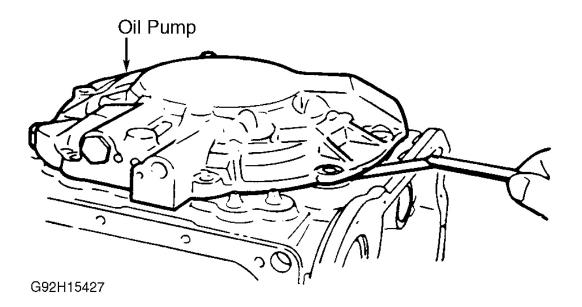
Measuring Oil Pump-To-Case Clearance Courtesy of FORD MOTOR CO.
